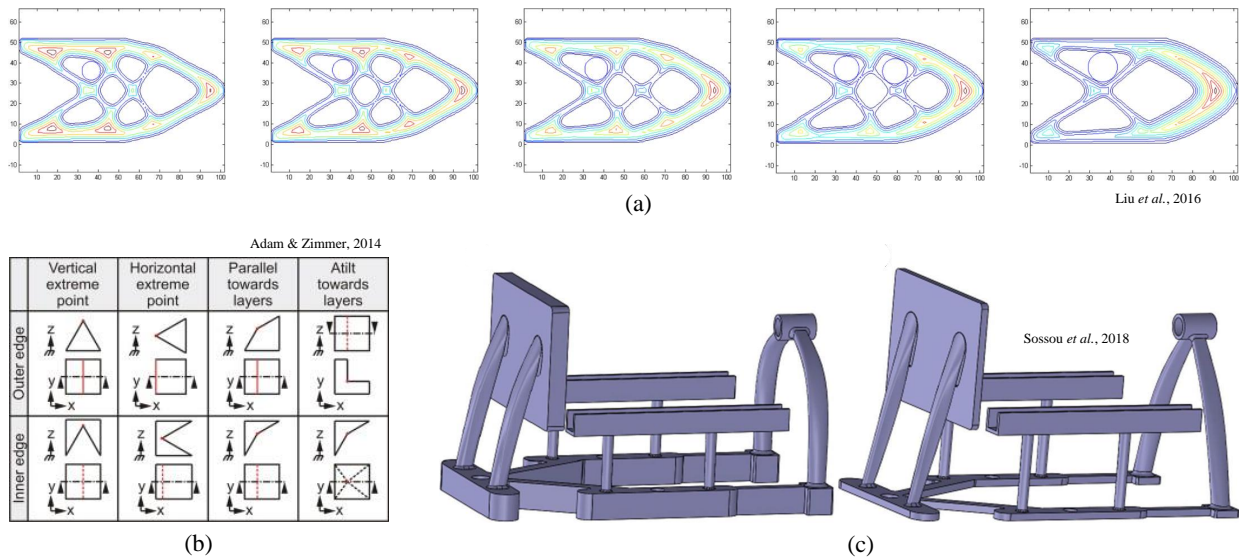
Successful examples of process-driven design under manufacturability constraints. (a) topology optimization under machining radii constraints [140], design feature catalog for AM parts [141], and (c) design of a mechanical assembly under AM manufacturability constraints [142]. (Panels (a) and (b) © Elsevier Ltd. and reproduced with permission. Panel (c) published under CC-BY 4.0 license.)
